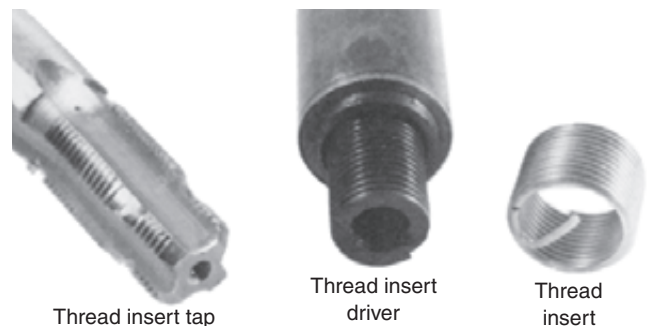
Thread insert tap, driver, and repair insert for spark plug holes.
